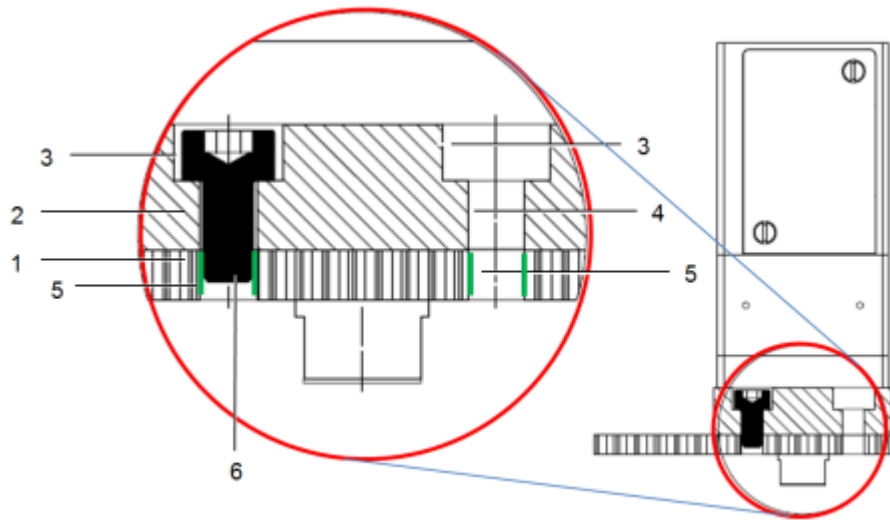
Recommended fastening on the surface (cross sectional drawing, only one screw is screwed in for better representation)
